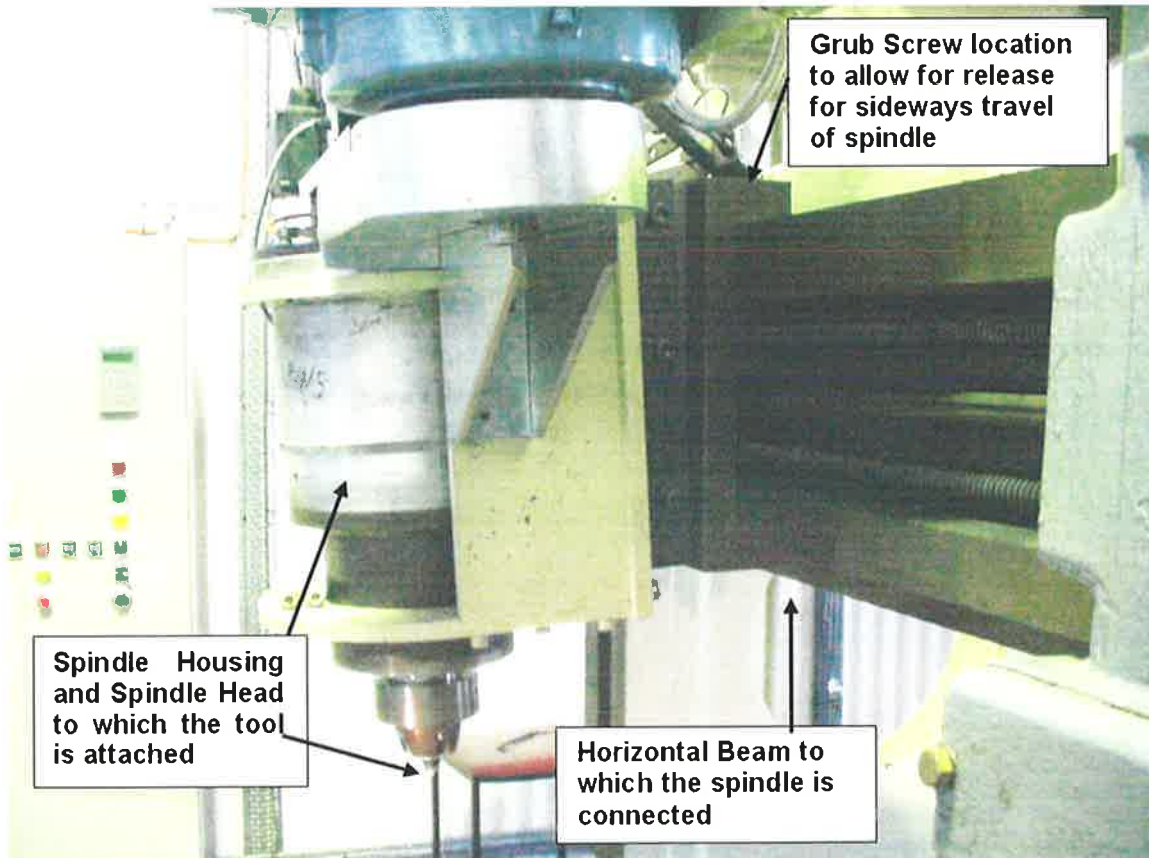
Friction Stir Test Bed spindle and spindle support beam.
